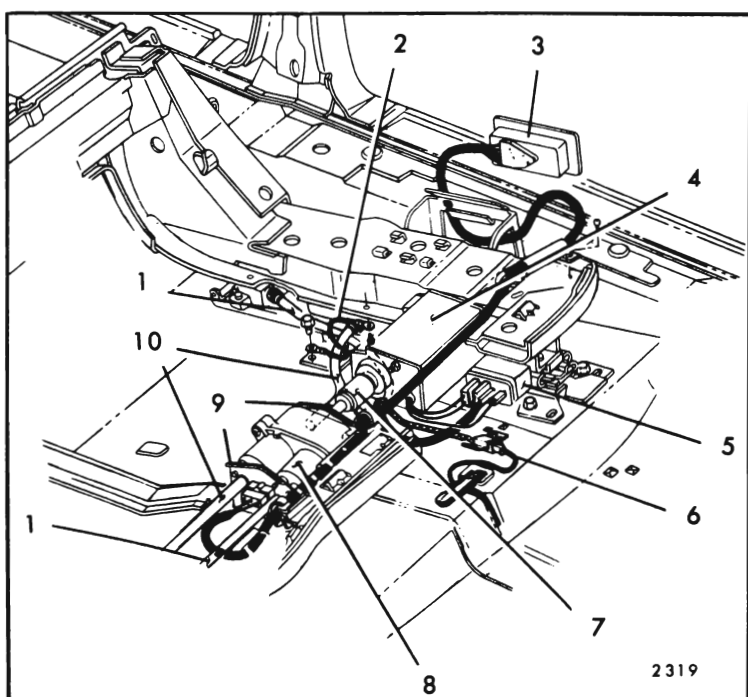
Four-Way Bench Seat Wiring - "B & C" Body Styles
